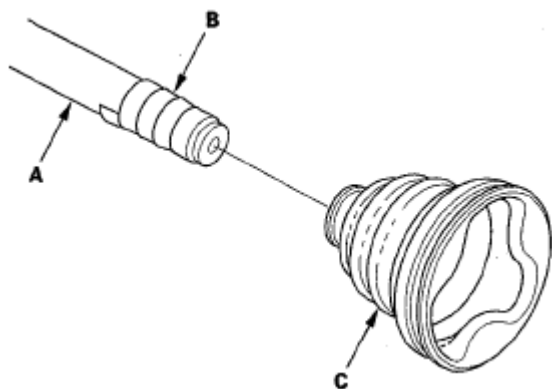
Identifying Splines On Driveshaft With Vinyl Tape
